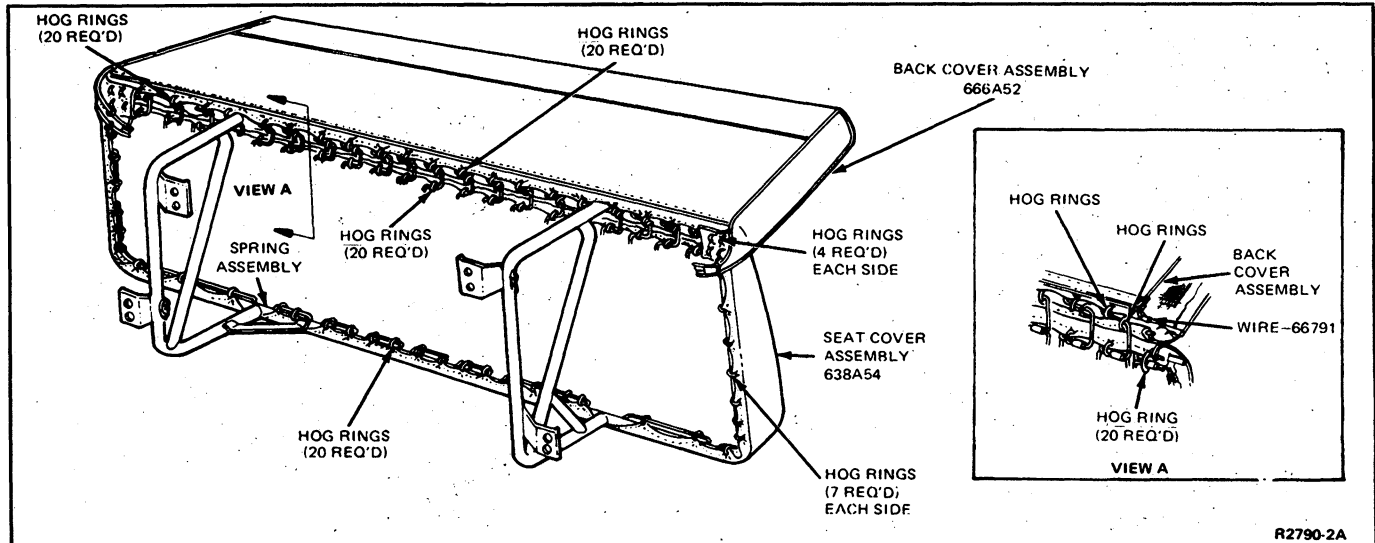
Rear Seat Cover Assemblies—E-150—E-350 (Four Passenger Seats)
